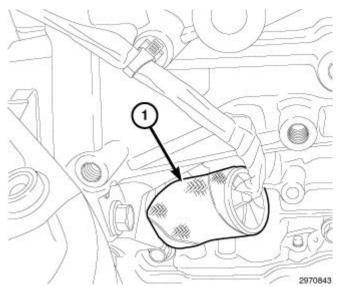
Rear Engine Mount Heat Shield & Bolts Courtesy of CHRYSLER GROUP, LLC
